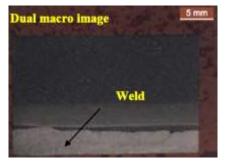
Mounted micro samples of shafts showing distinct regions.
